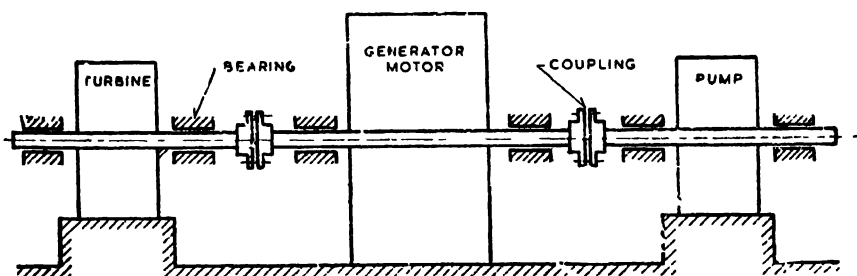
Horizontal Arrangement of Pumped Storage Plant
